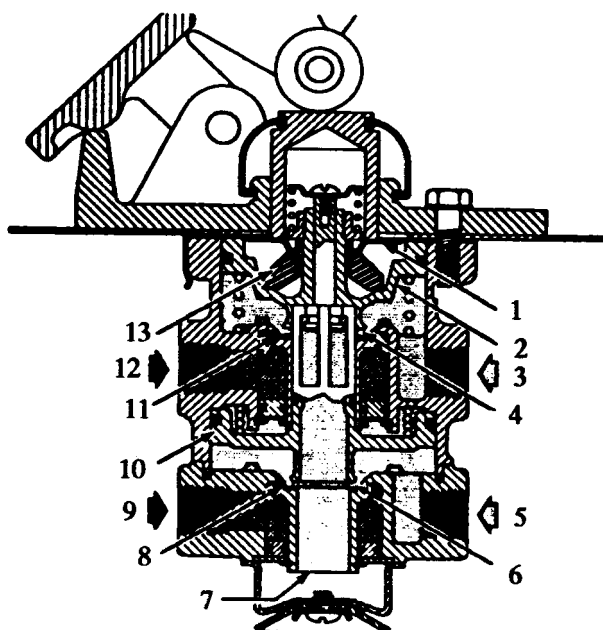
Releasing -Primary Circuit of (Foot) Brake Valve
